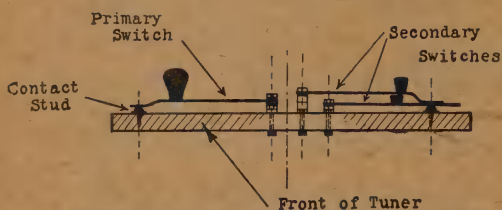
Sectional View of Front End of Tuner, Showing Switches and Method of Securing Them
